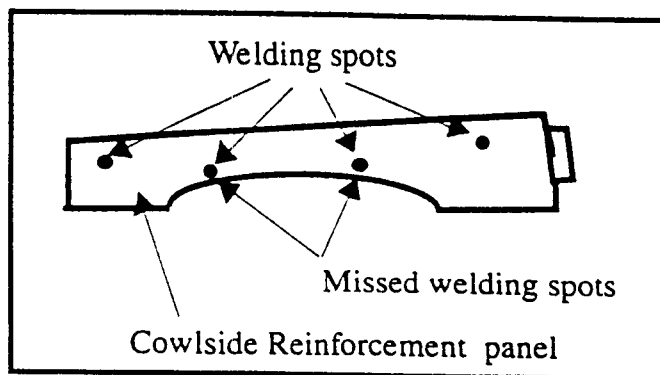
Case 3 fault mechanism: missed welding spots after welding tip dressing operation.
